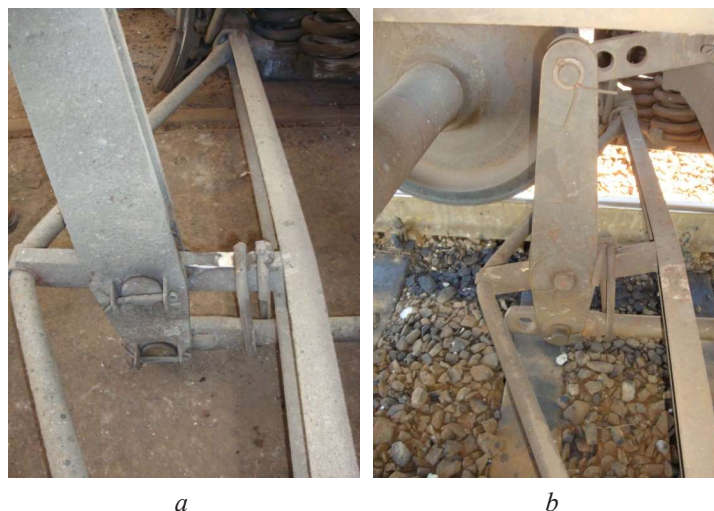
View of the damaged elements of the carriage lever transmission: *a* – local wear of the triangle spacer and a damaged device for uniform pad wear; *b* – blockage of the triangle due to a damaged device for uniform pad wear
